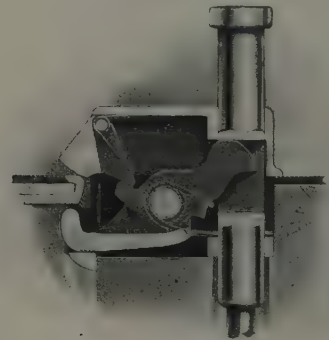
Section of Design H, Trap Door Lock, in Normal Position, With Door Locker Down.
